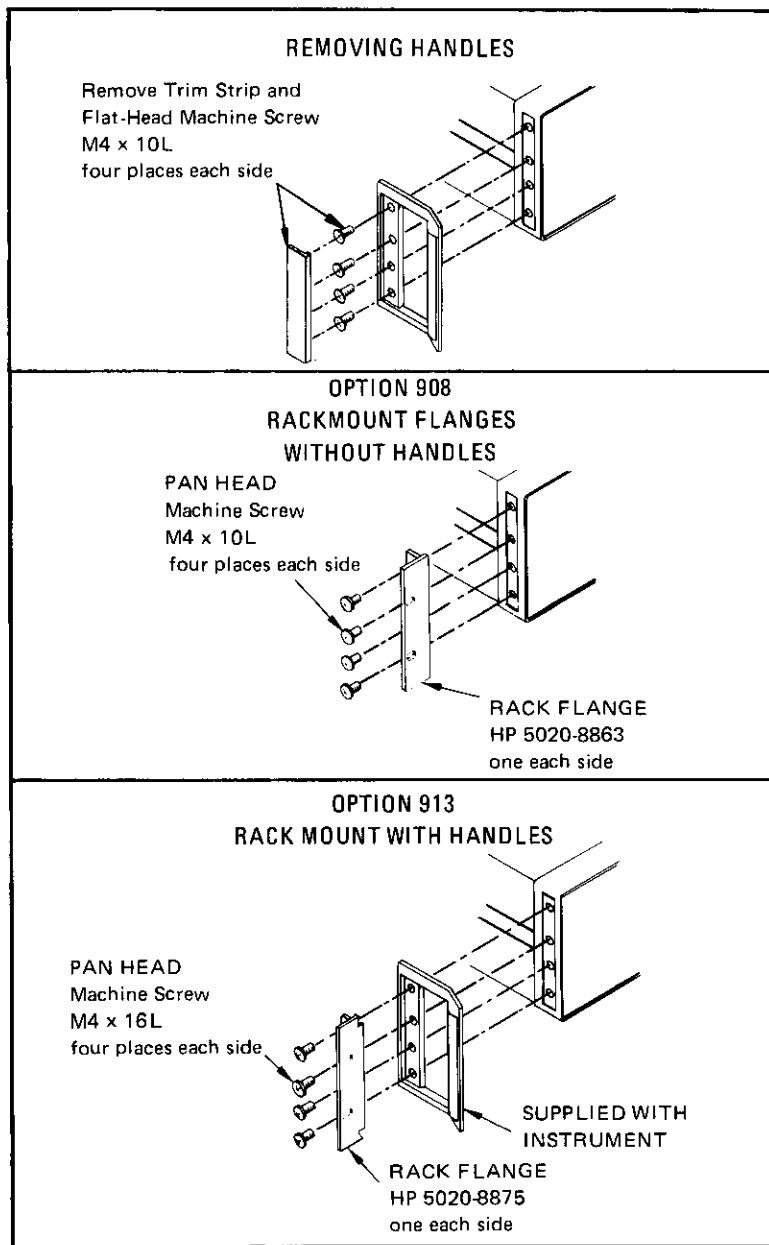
provides rack-mount option screw sizes, and handle- or bracket-positioning for proper rack-mount installation. Angle brackets (HP Part Number 12679C) may be ordered to provide the additional rear or side support required of a mounted instrument.
